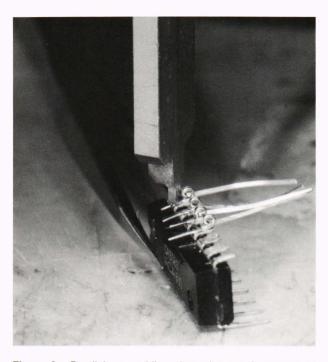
Parallel-gap welding electrodes attach component leads to posts, put leads onto leadless components, and put compliant leads onto components when required.
